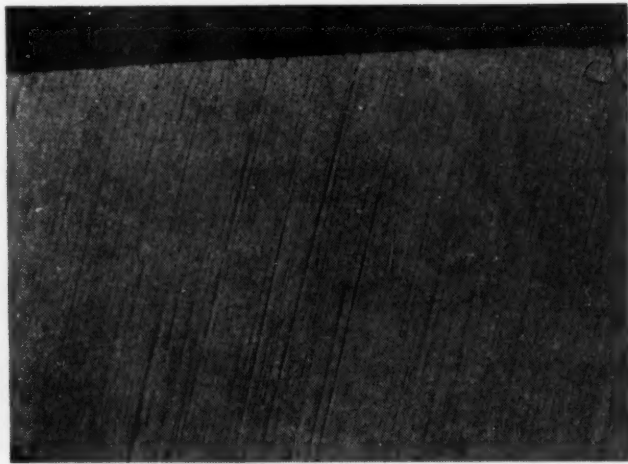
GEAR-SHAPER CUTTER EDGE GIVEN HIGH SURFACE FINISH AND KEENER EDGE
